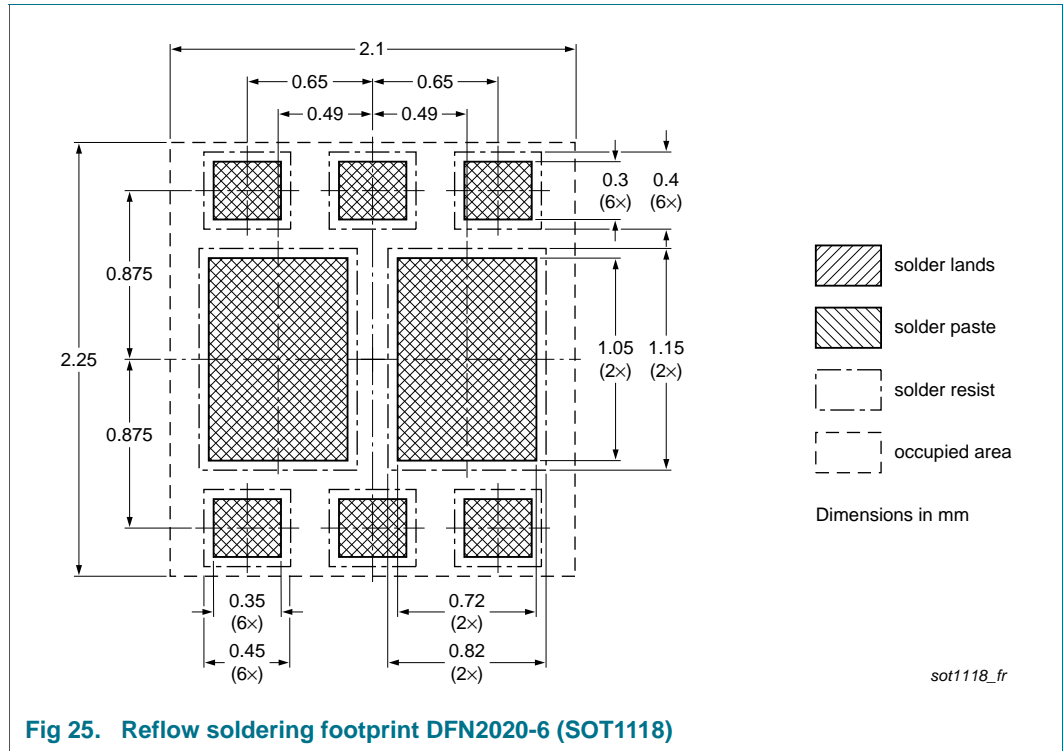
Reflow soldering footprint DFN2020-6 (SOT1118)
